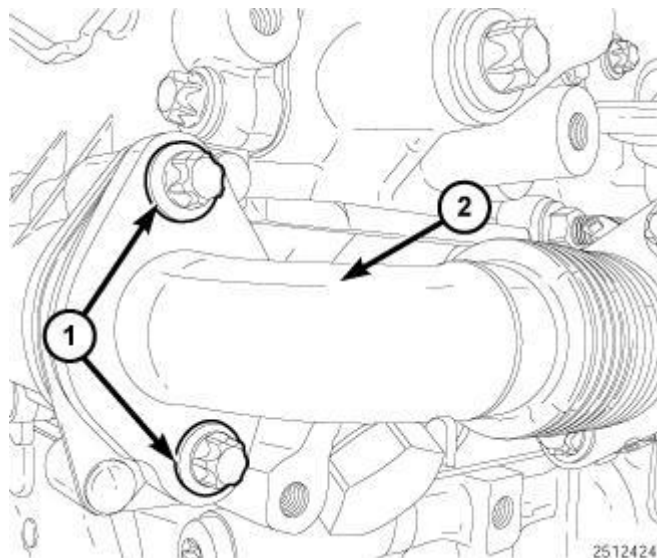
CAC Tube And Bracket Assembly Bolts
